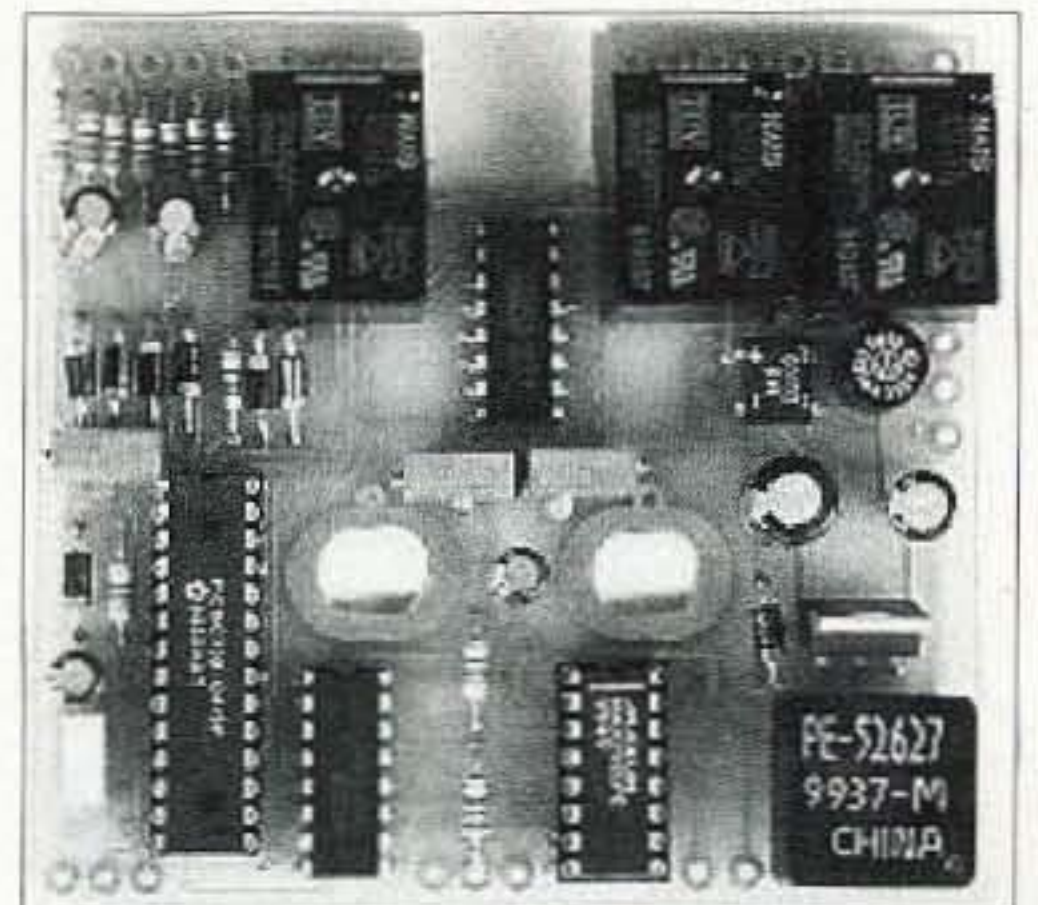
Photo A. The photo shows the completed board. It is a well designed and attractive printed circuit board.
